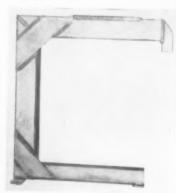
Welded Steel Design is stronger rigid yet weighs only 35 pound rigid yet weighs only 35 pound Weldment costs 33% less than original casting. Eliminates considerable time in machining and assembly.
